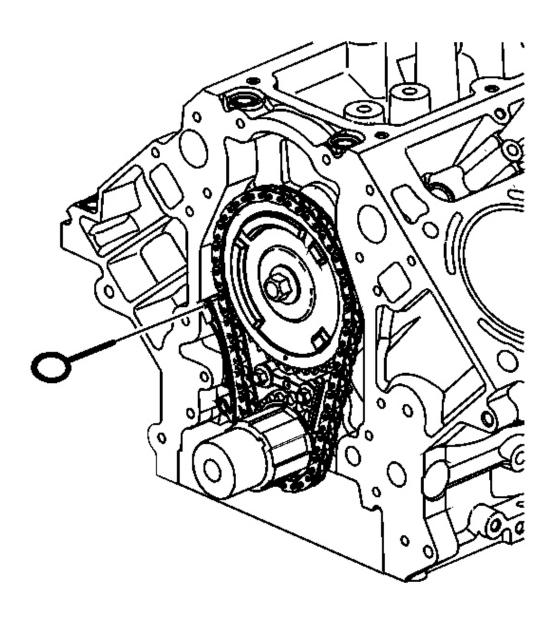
Tightening Camshaft Sprocket Bolt Courtesy of GENERAL MOTORS CORP.
